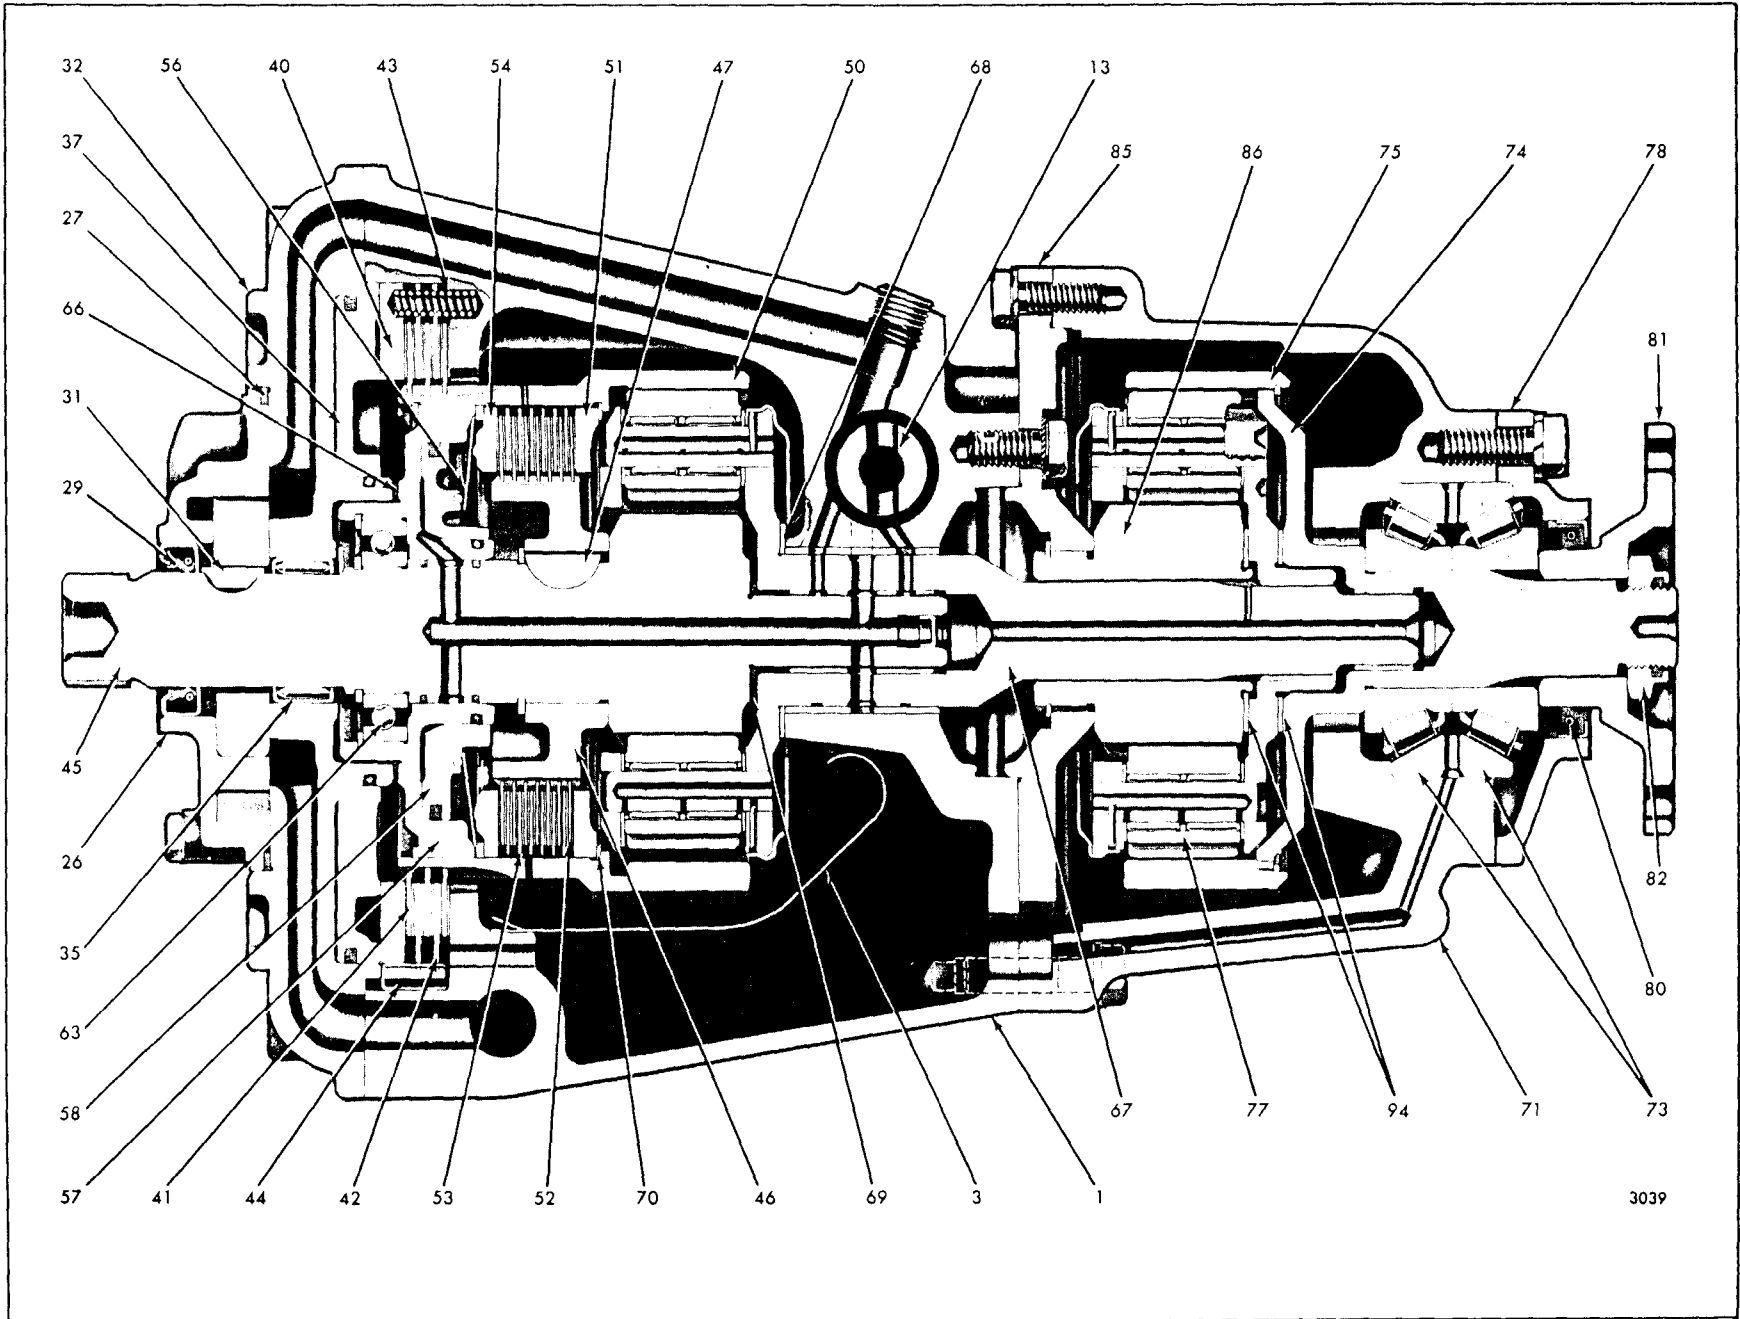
Warner Marine Gear Assembly (2.1:1 Ratio Model 72C Shown)
